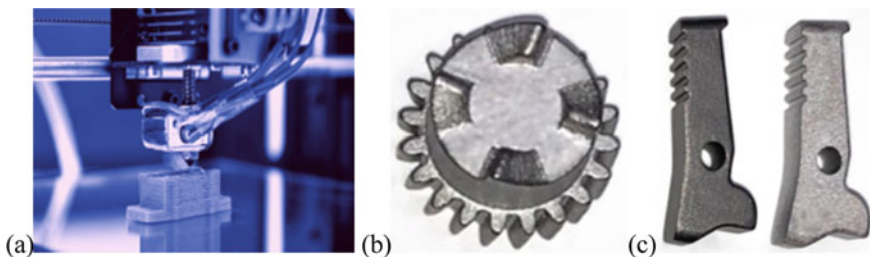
a Metal FFF 3D printer from 3DEO (Source 3DEO), b one metal end-use component (Source 3DEO) and c one optimized rack-wheel part (Source 3DEO)
